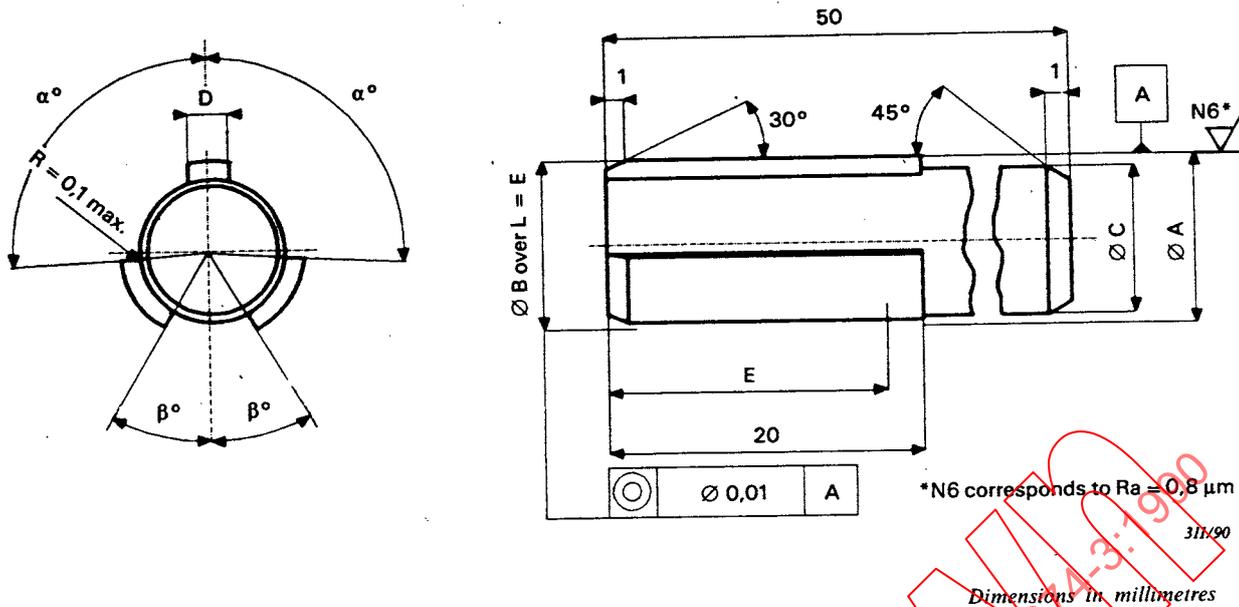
Gauge dimensions for adaptor interface (see also table 4)
